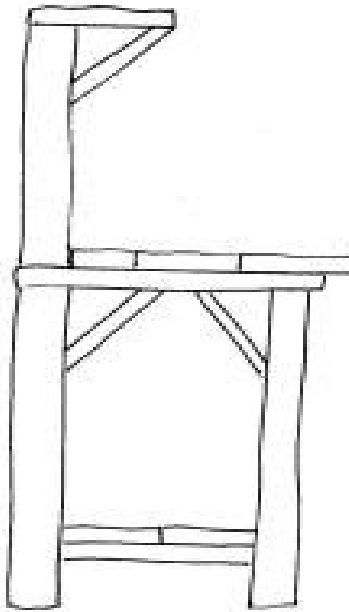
Side View with diagonal braces attached – see bottom shelf placement.
